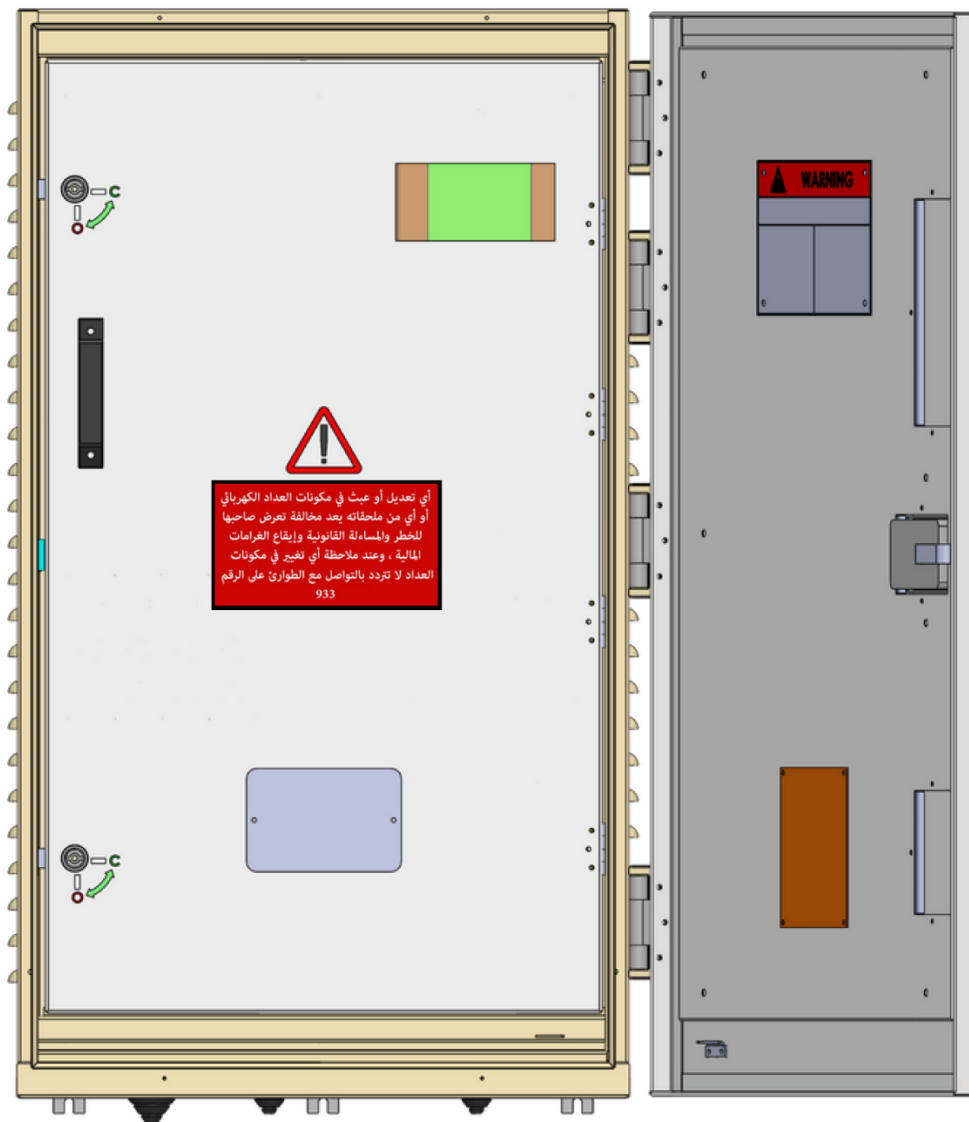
Layout Drawing of 200/250A CT-Meterbox with Steel Enclosure Showing the Maximum Allowable Dimensions
